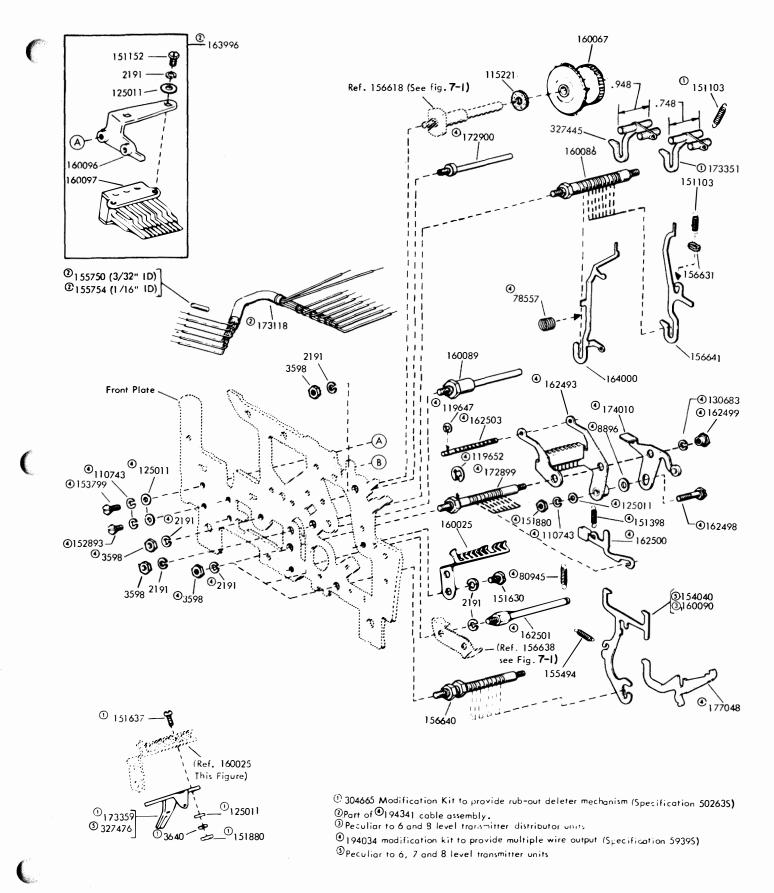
Front Plate Mechanism (6, 7, and 8 Level Units)
